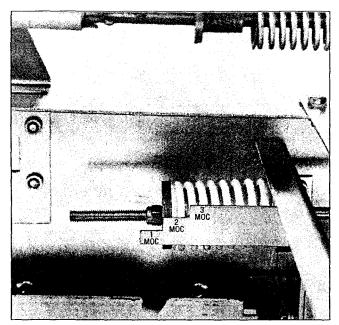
Drive Spring Shown Adjusted for 2 MOC Switches
